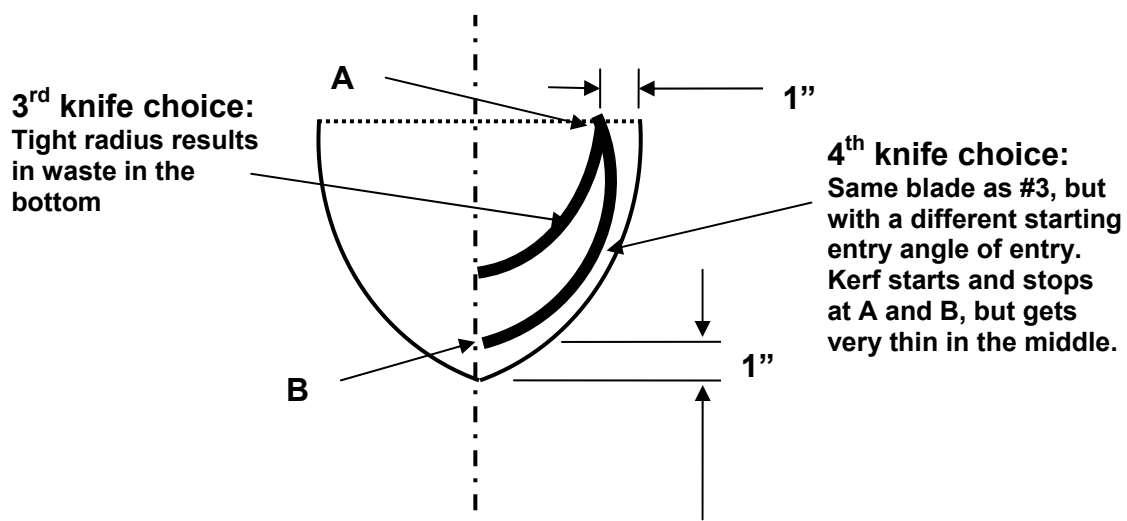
Side view of tall coring blank with two additional knife kerfs
